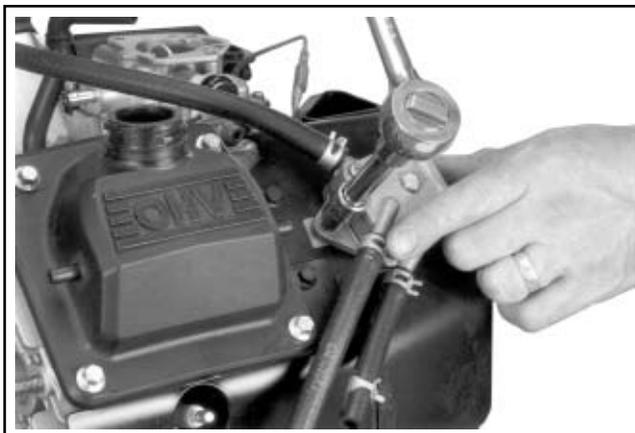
Removing Screws Holding Fuel Pump (Metal Bodied Pump Shown).
